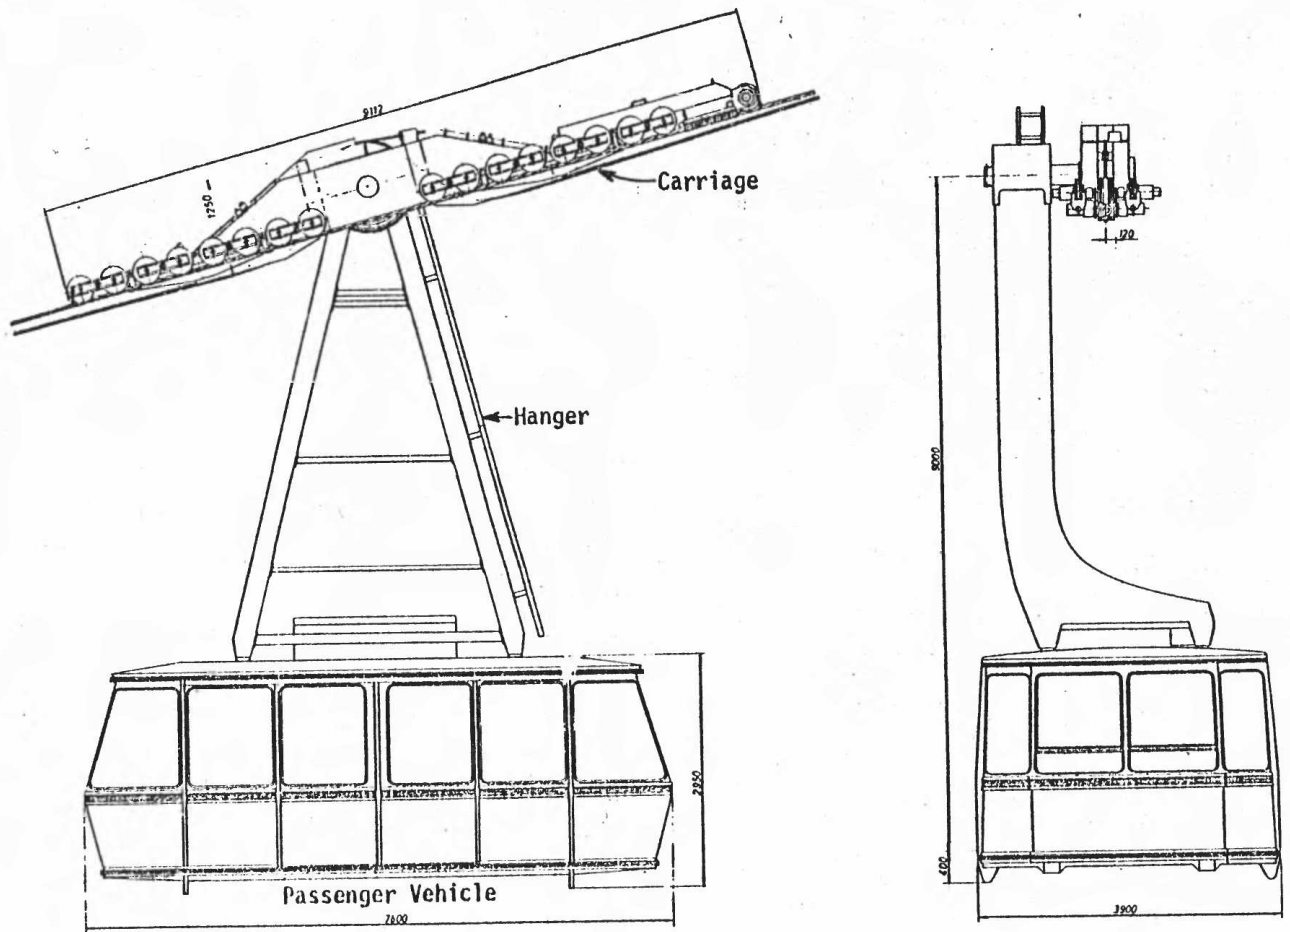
ROOSEVELT ISLAND VEHICLE SIDE AND FRONT VIEW WITH MAJOR DIMENSIONS (mm)
